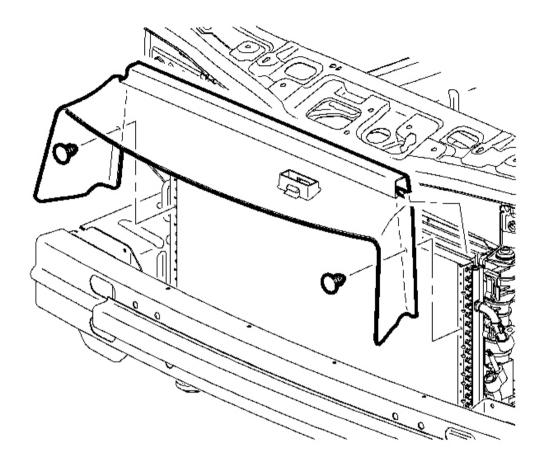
View Of CRFM Closeout Panel To The Condenser Courtesy of GENERAL MOTORS CORP.
